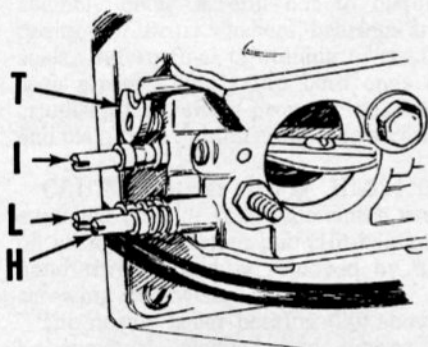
View of carburetor adjustment screws. Refer to text for adjustment.
